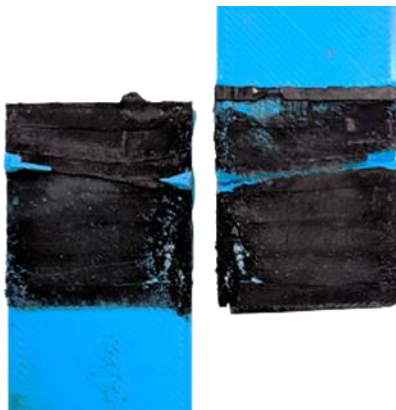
Typical failure surface for welded SLJ, nominal welding area is 25x25 mm.
